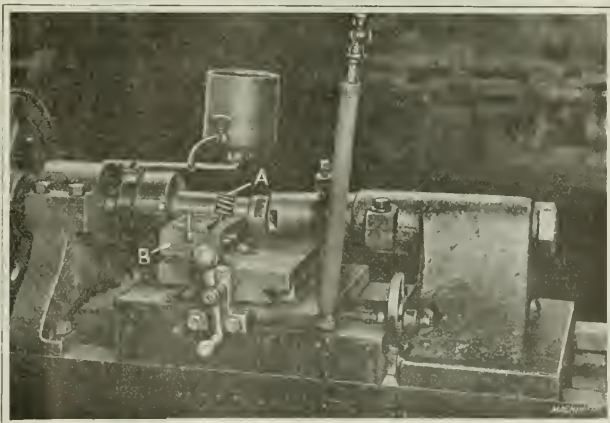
Equipment used in milling the End Surfaces of the Chasers in which the Threads are subsequently cut
